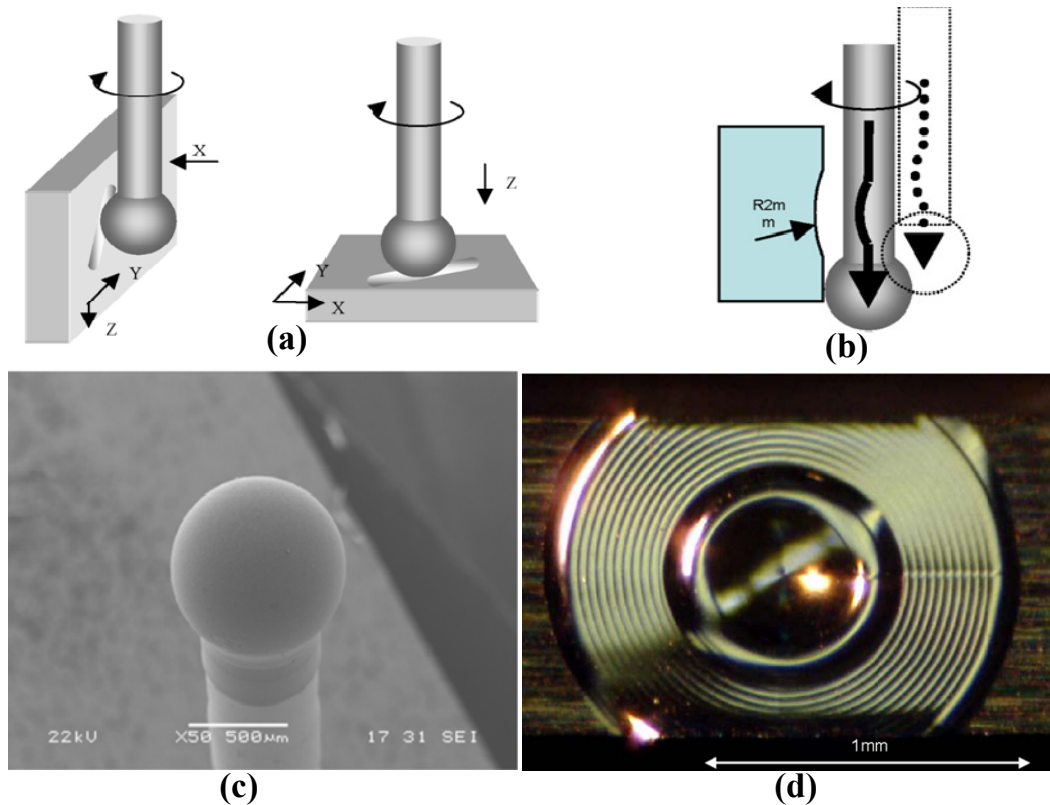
(a) The concept of machining on XY and YZ plane using a spherical PCD tool on a 3-axis machine, (b) concept of freeform surface generation, (c) on-machine fabricated spherical PCD tool and (d) machined sample of a shaped convex spherical surface on tungsten carbide (Masaki, T., et al., 2007).
